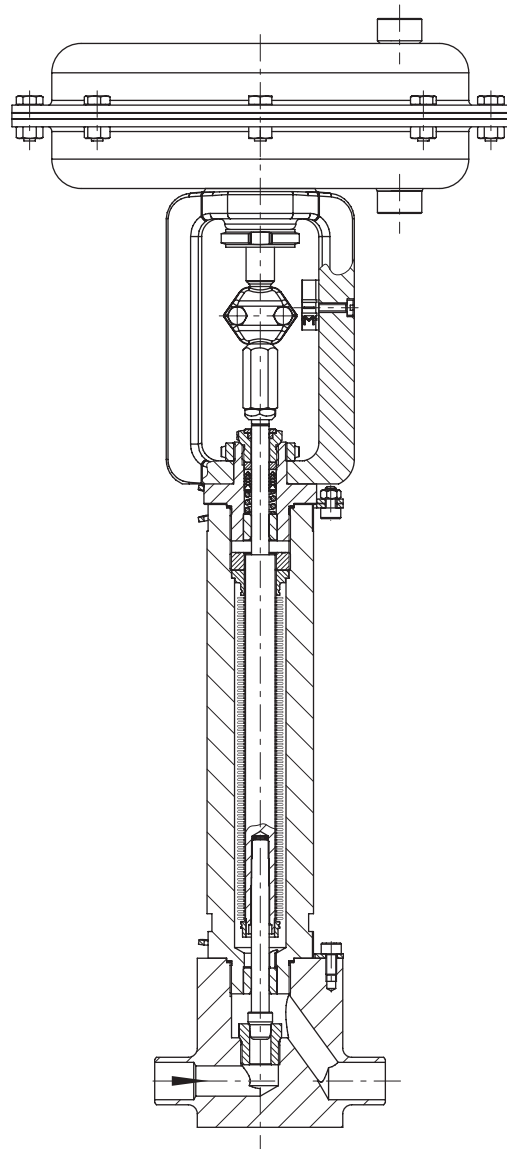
· Type 3252-1 High Pressure Valve with extension bonnet or bellows seal
